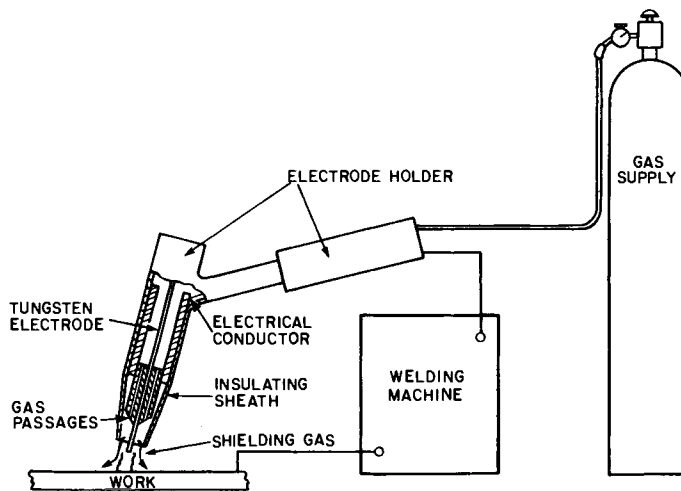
Schematic diagram of gas tungsten-arc welding.⁽¹²⁵⁾
